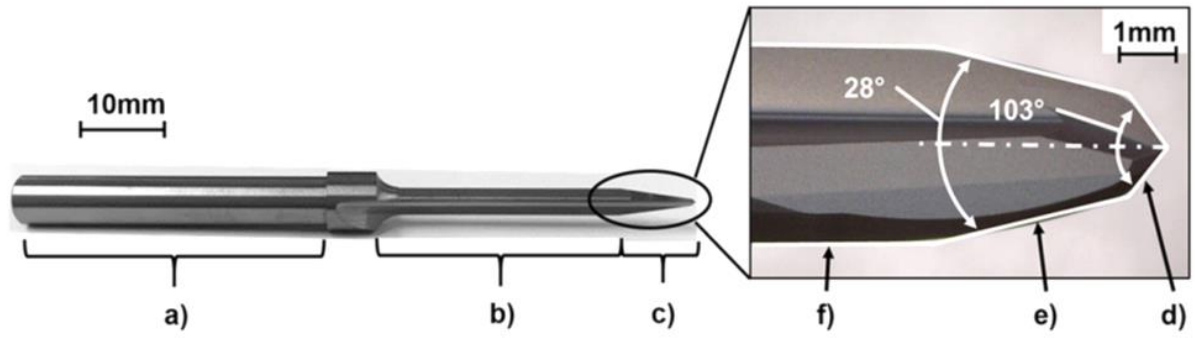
WC-Co drill for CFRP drilling: (a) drill shank side, (b) reamer cutting side, (c) drill cutting edge side, (d) primary cutting edge, (e) secondary cutting edge, and (f) tertiary cutting edge.
